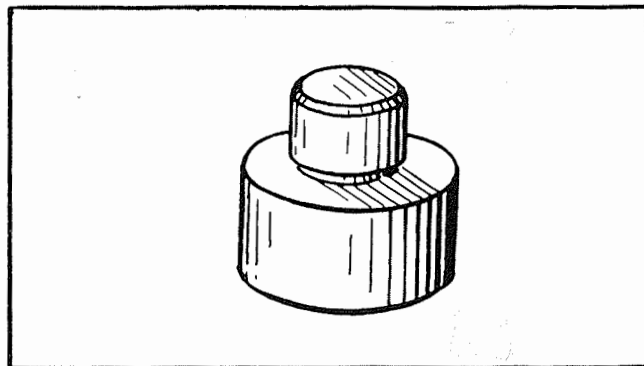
Fuel Pump Drive Shaft Oil Seal Installing Plug
